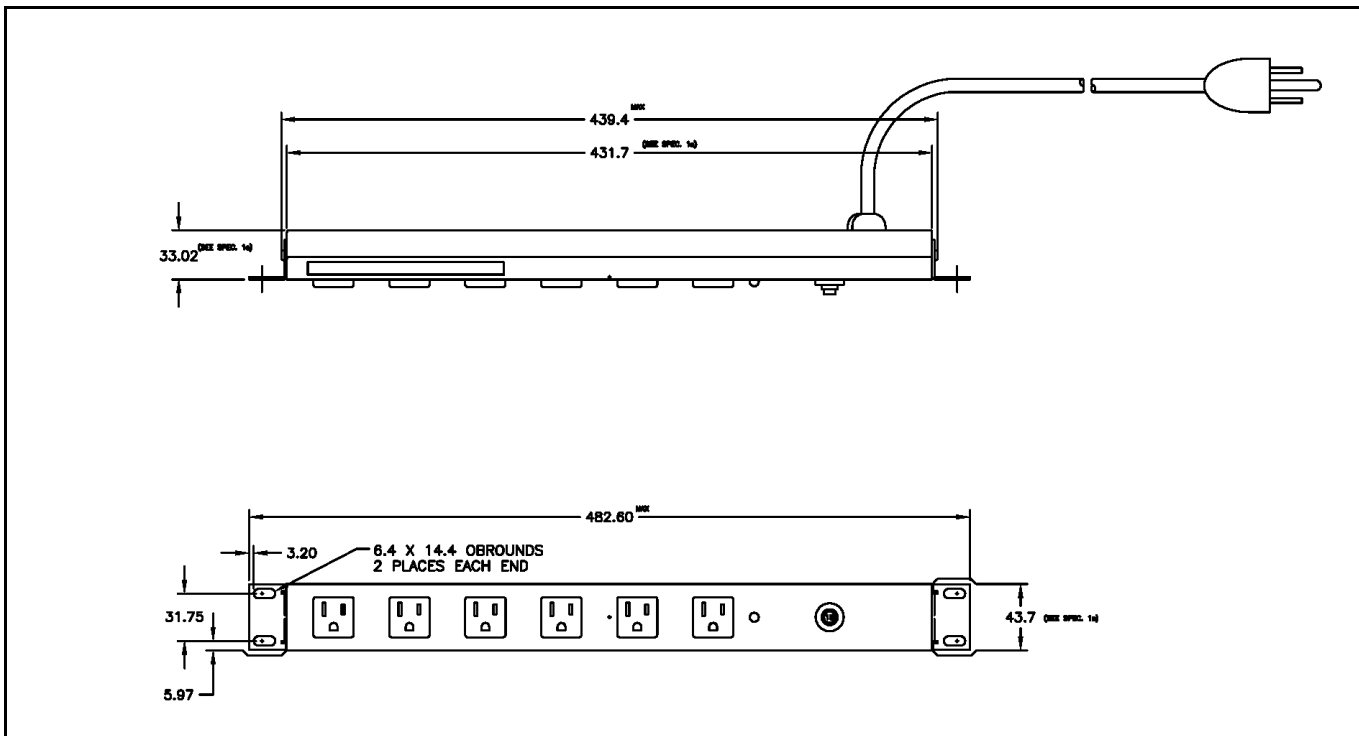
Assembly Diagram of AC Outlet Strip NED 901 06/2
